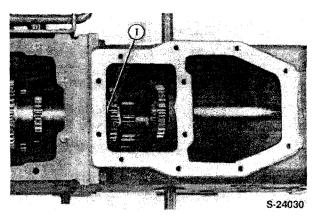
Hydraulic Lift and Transmission Cover Removal 1. Buckle-Up Bolt -Internal
